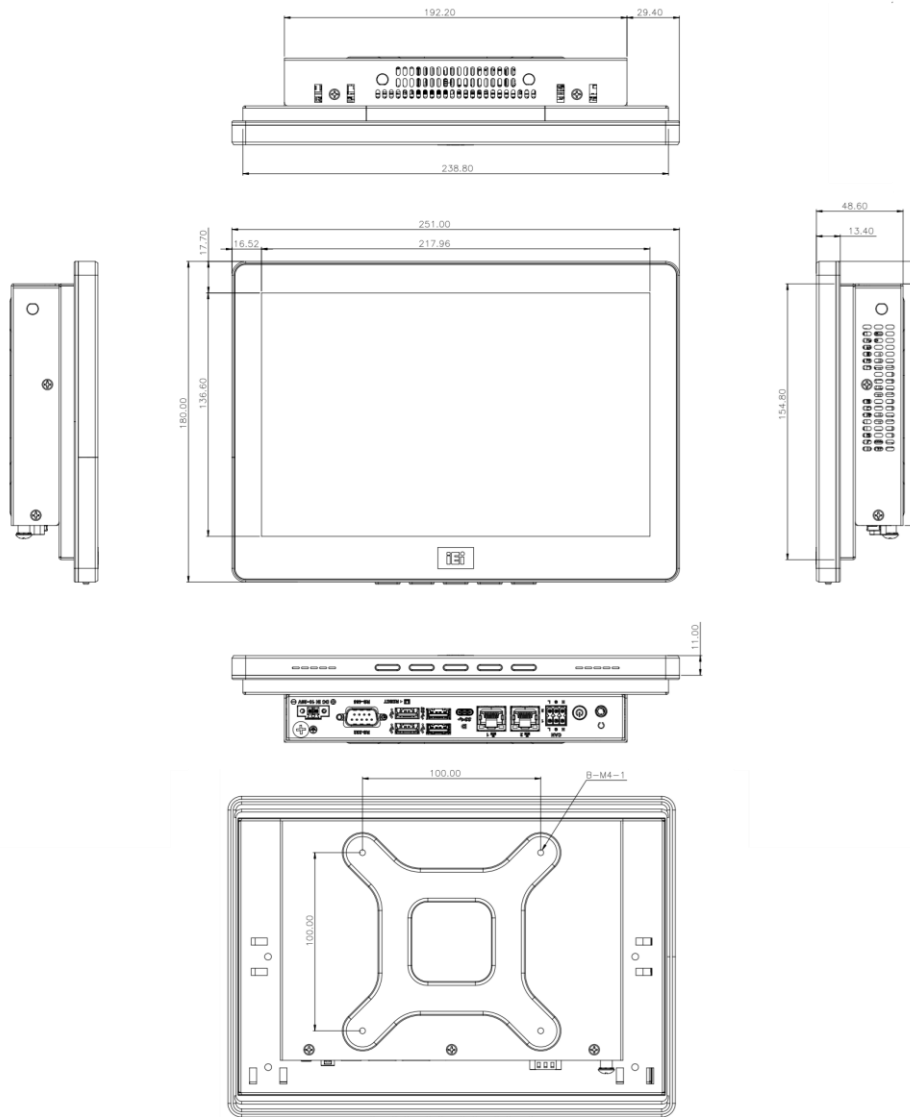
AURA-W101-RK3576 Dimensions (Unit: mm)
